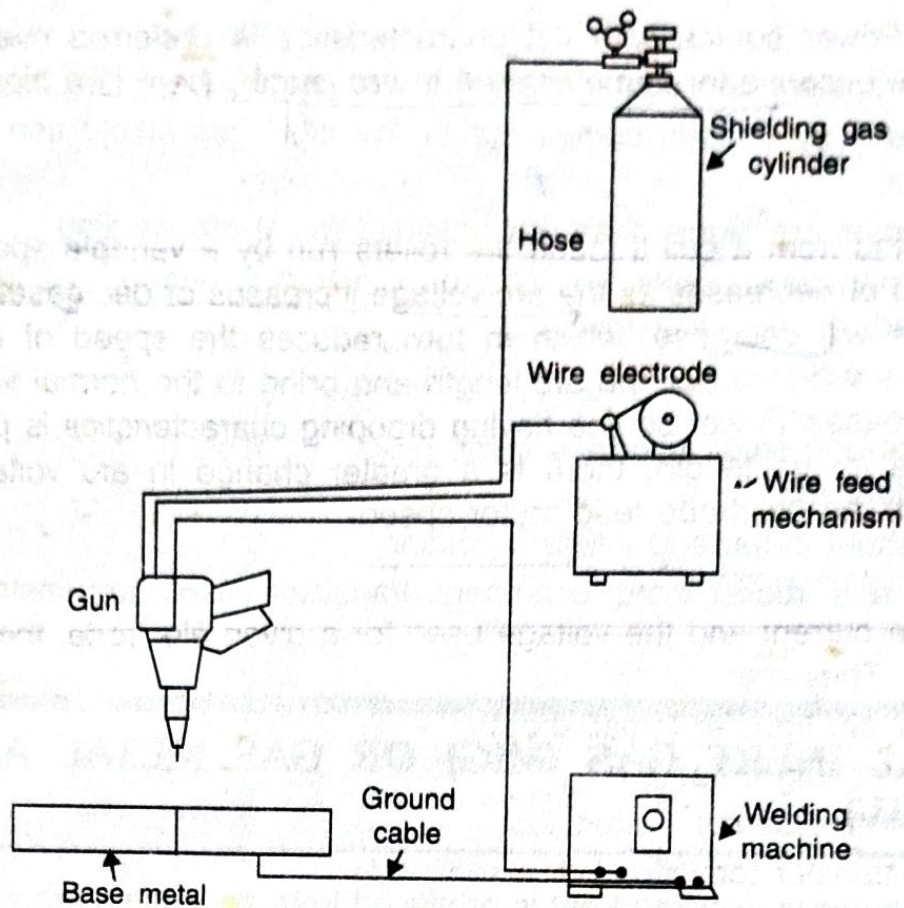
(b). Setup of Metal Inert Gas Welding (MIG).
